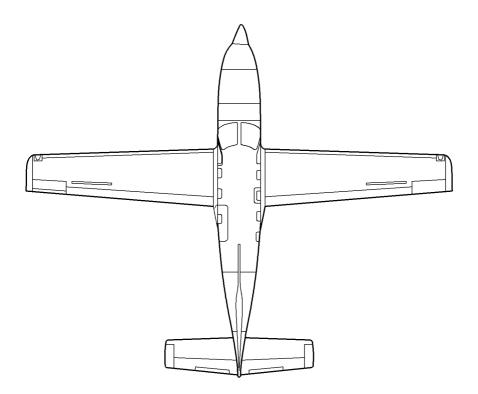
(2/2) - THREE VIEW DRAWING
